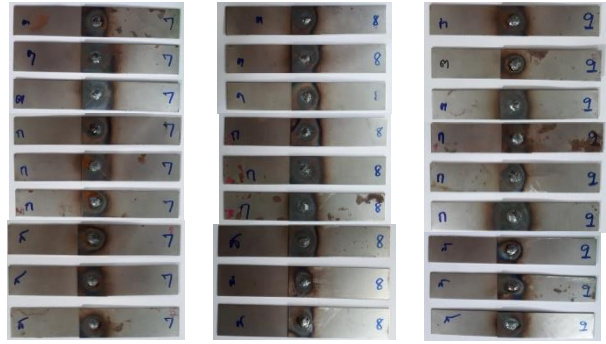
Prepared plug weld specimens before tensile-shear test
